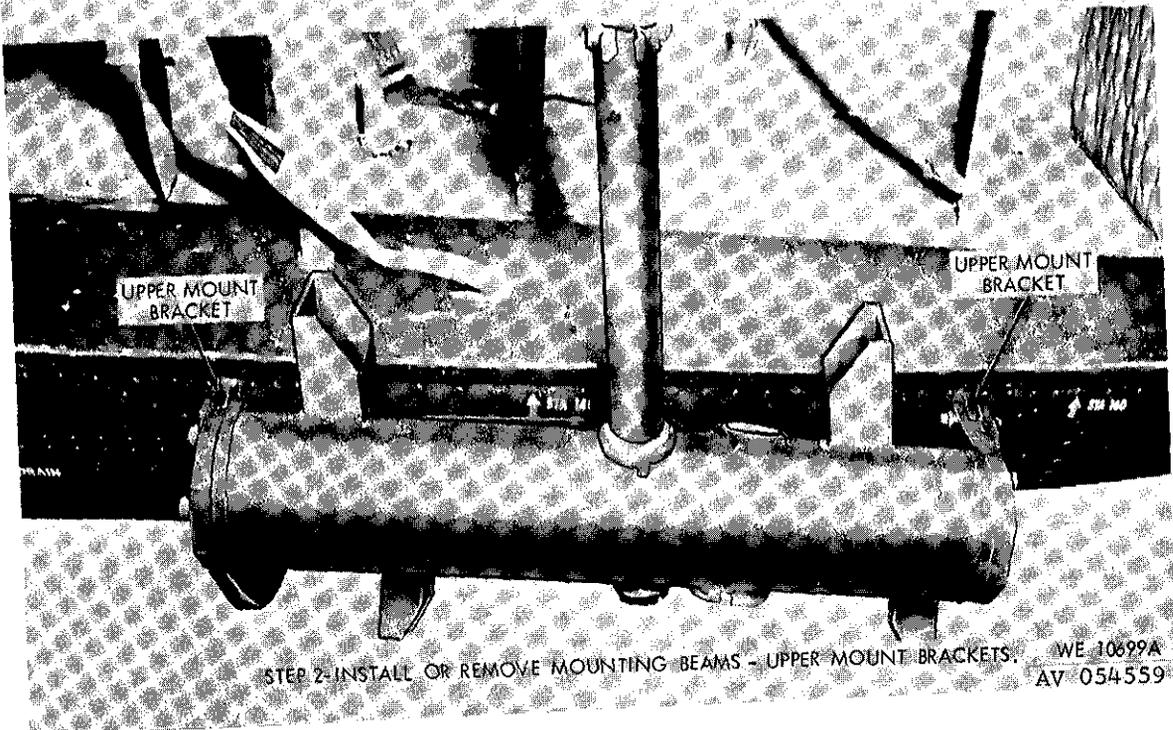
Armament subsystem M23 mount assembly - installed on helicopter - left side shown
